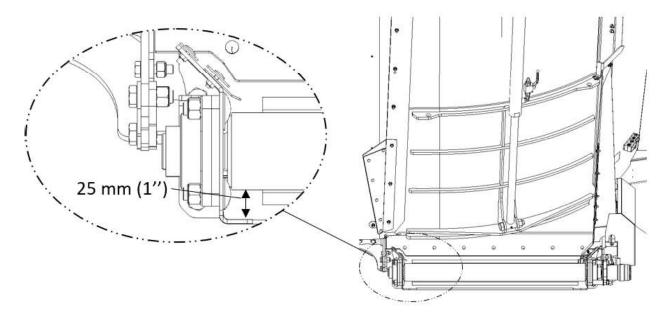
Clearance Between the Conveyor Belt and Frame for the SMARTMIX with Horizontal and Inclined Conveyors
